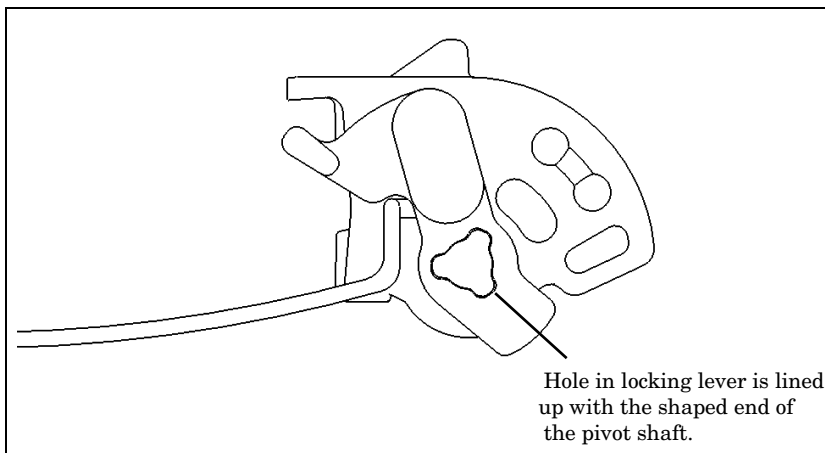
Lining up the locking lever with the shaped end of the pivot shaft on needle guide UA1265 ready for removal.
